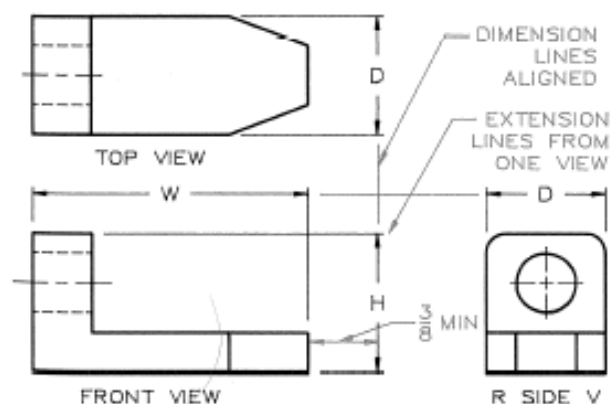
Dimension and extension lines used in three-view orthographic projection should be aligned. Notice that extension lines are drawn from only one view when dimensions are placed between two views.
